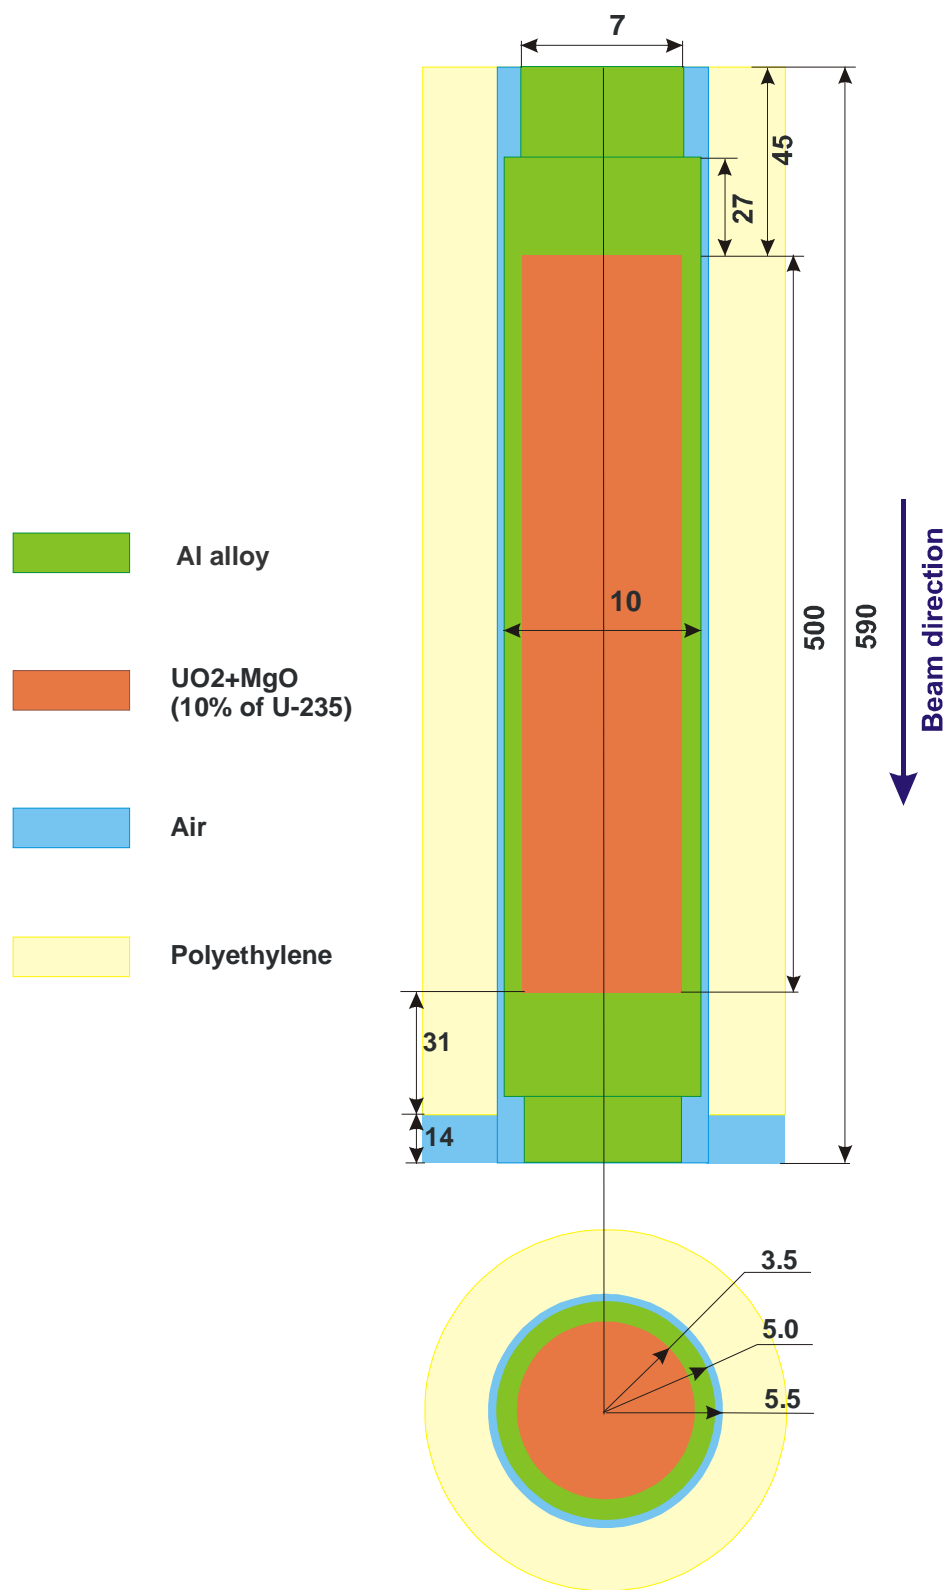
X-Z and Z-Y cross-section views of the EK-10 fuel rod, dimensions in mm.
